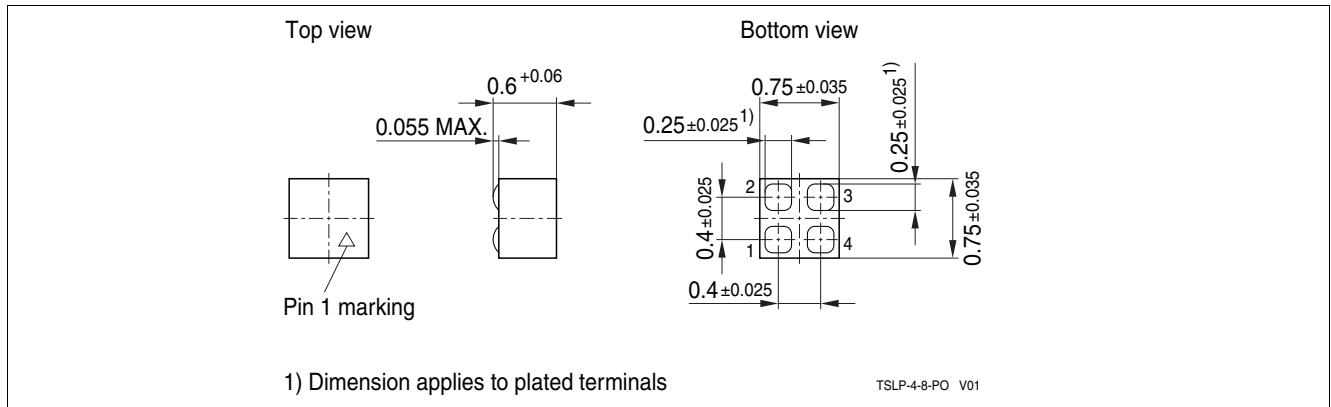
Package outline for TSLP-4-8 (dimension in mm)
